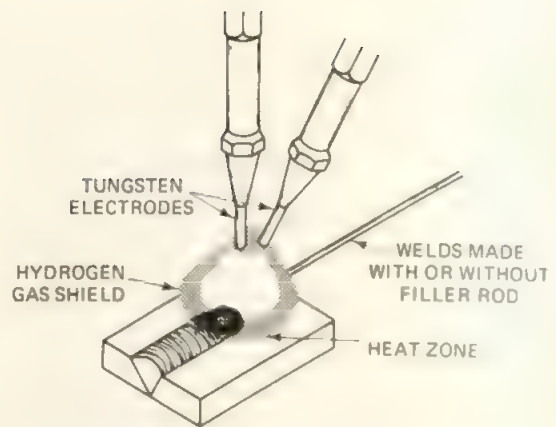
Atomic hydrogen welding process.
